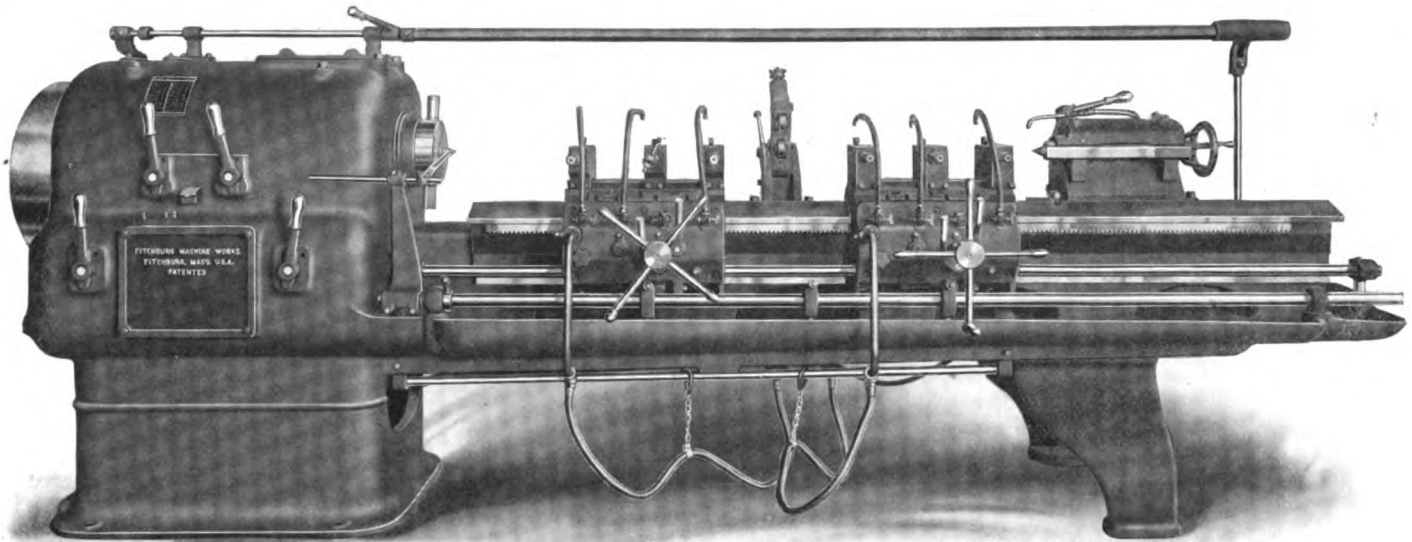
8" x 84" *So-swing* Lathe with Standard Equipment. Also Furnished in 8" x 60" and 8" x 108" Sizes as Required
